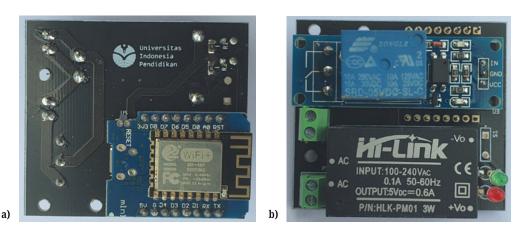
A photograph of one unit PCB kit that has been assembled for lamp socket and power plug nodes, including (a) top view, installed ESP8266 Wemos D1 mini; (b) power plug, installed SONGLE SRD-05VDC-SL-C relay module, Hi-Link HLK-PM01 3W AC-to-DC converter, AC in/out voltage terminal, and 1 mm LED as power indicator (red) and connect to the network (green)
